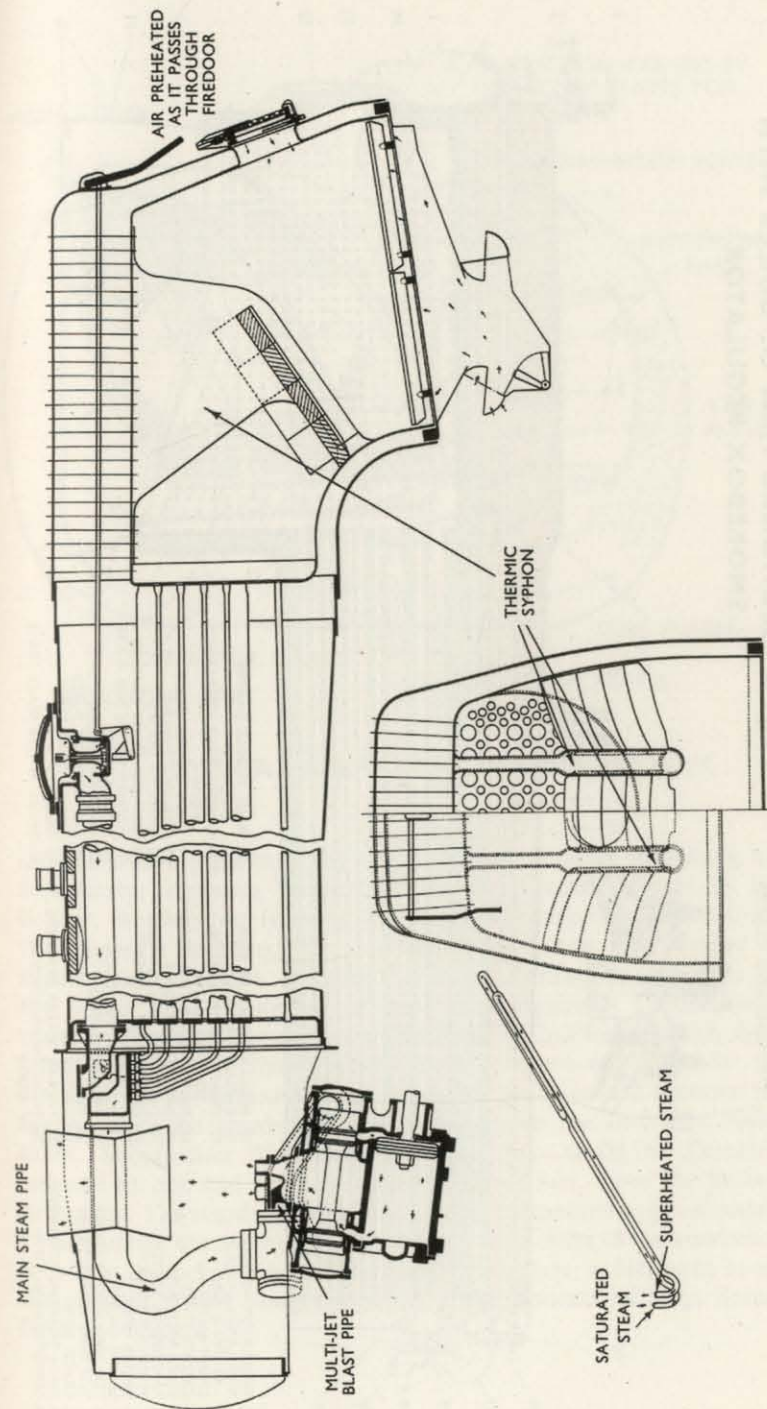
SECTIONAL VIEW OF BOILER WITH THERMIC SYPHON
